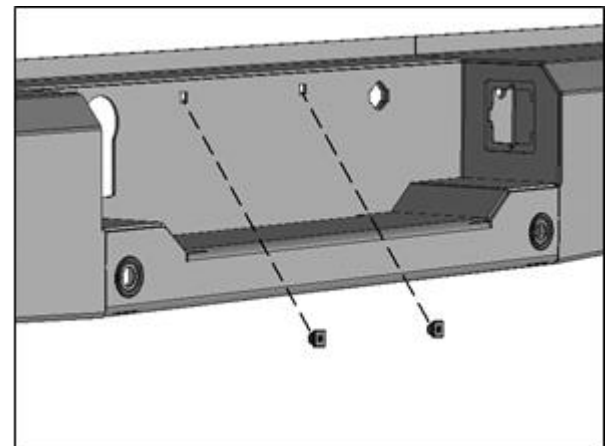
Reinstall integrated receiver hitch/bracket assembly on models with "HD Towing" package
